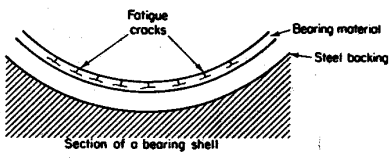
Shape of typical fatigue cracks in a bearing.
